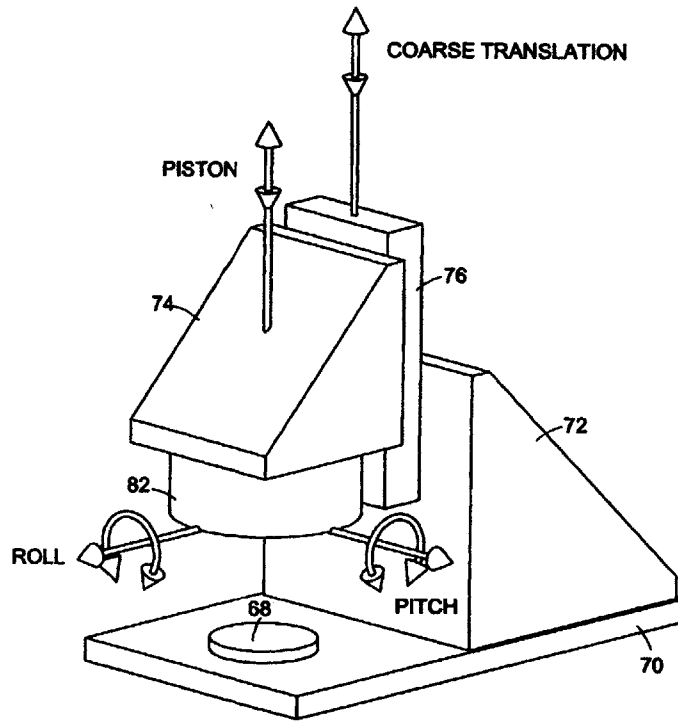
An illustration from the U.S. Patent filing of Kendale's planar microcontact printing machine [36], [37]. This machine precisely controls the roll, pitch, and height of the stamp to enable precise plate-to-plate printing. Though this form of displacement control might work for smaller wafers, it cannot be scaled up to a large area or continuous process.
